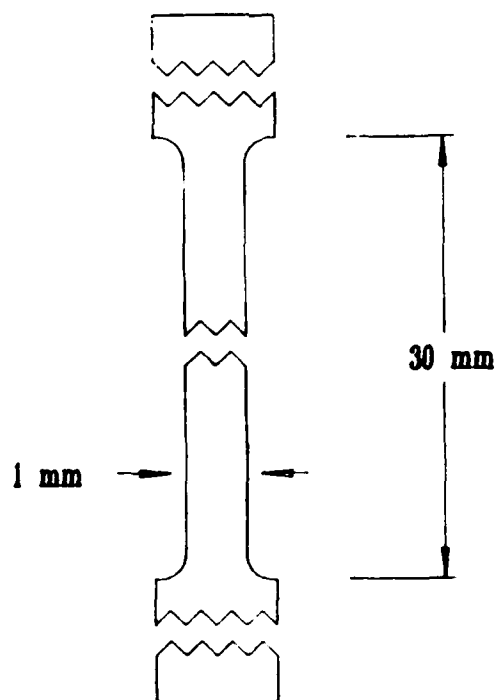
DRAWING SHOWING THE CONFIGURATION OF THE YTTERBIUM TEST SAMPLES THAT WERE "PULLED" IN QUASI-STATIC TESTING
